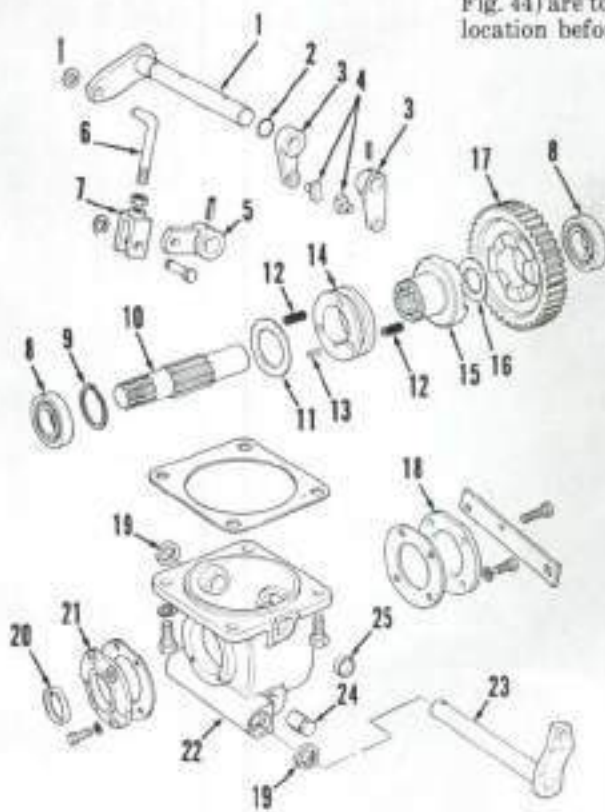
Exploded view of transfer gearbox used on models with powershift transmission and Carraro front drive axle. Note that selector linkage is slightly different on 1594 models.
